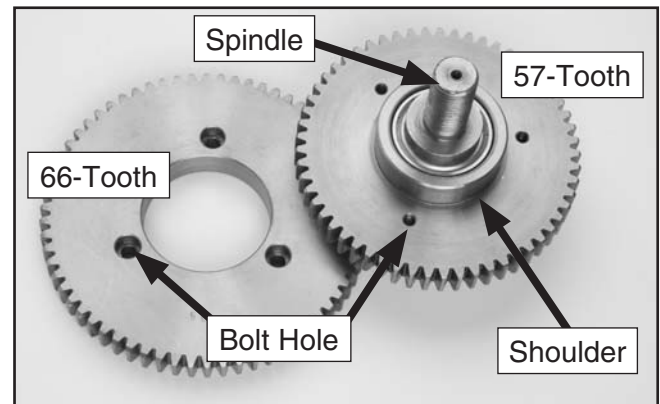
Center spindle, 57-tooth gear, and 66-tooth gear.
